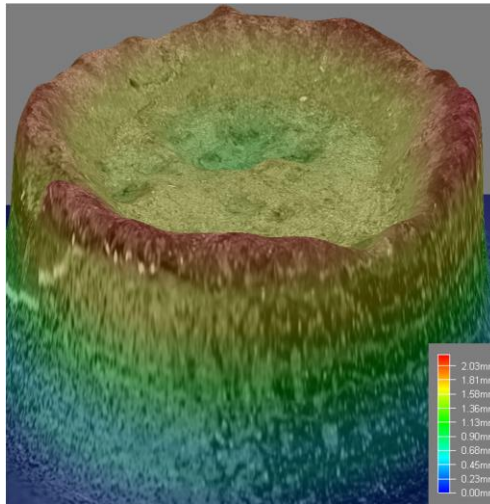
Representative Fracture Surface of AM Specimens.
